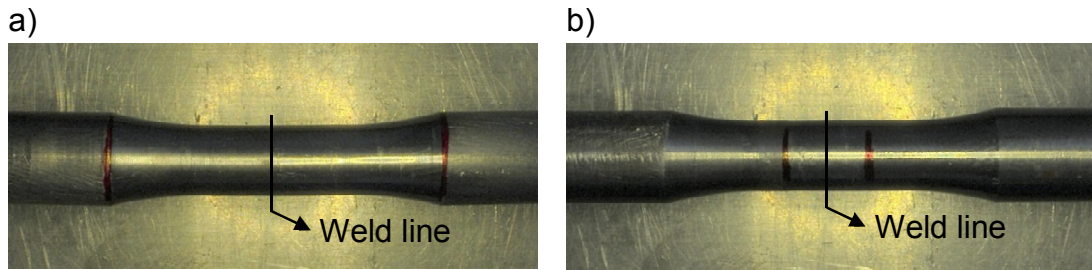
The burnished region between the two-red line for the welded joints a) RB for whole specimen and b) RB for weld zone.
